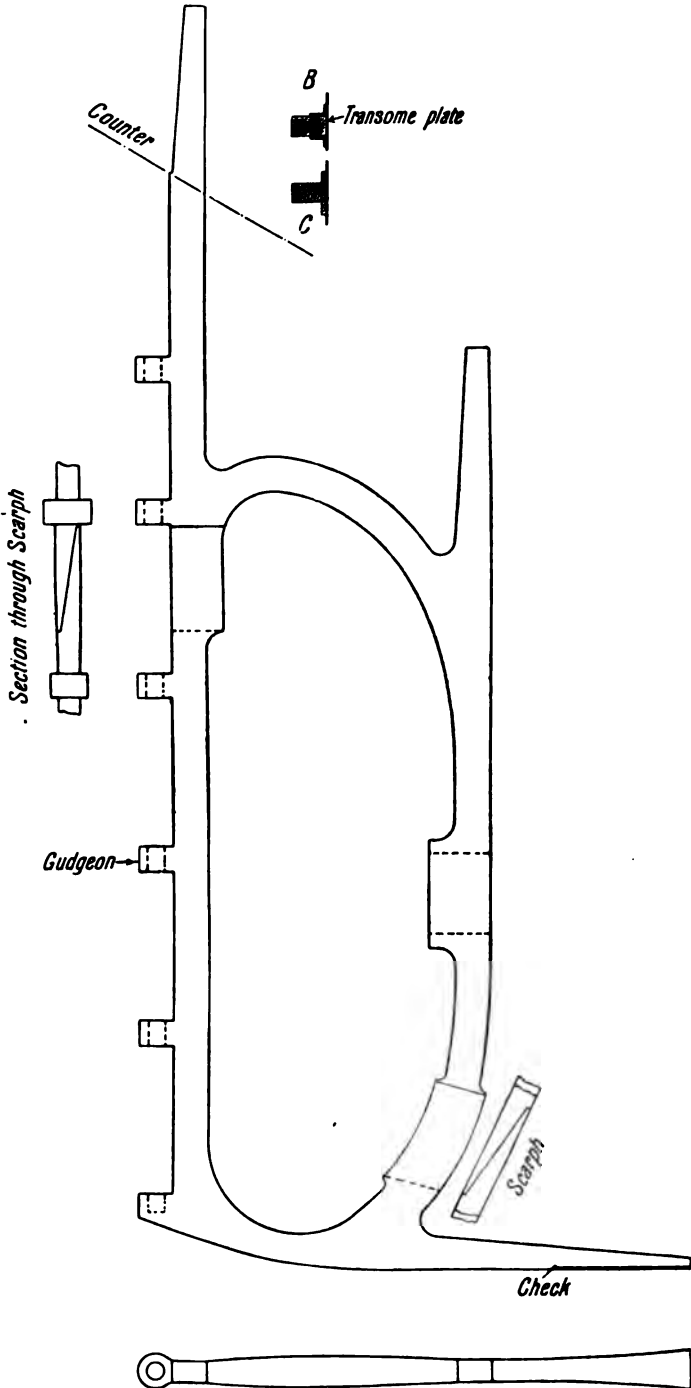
Stern Frame for a Single-Screw Steamer. Frame in two parts connected by Scarfs.
